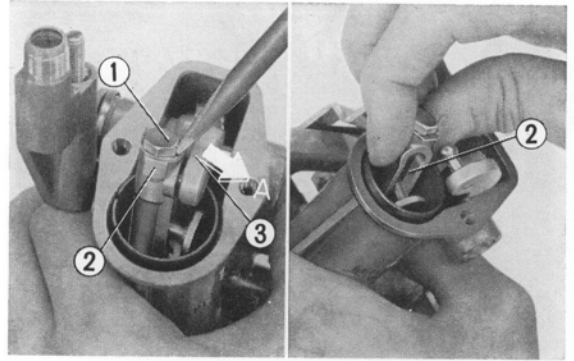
① 6 mm bolt ② Throttle shaft ③ Link arm
